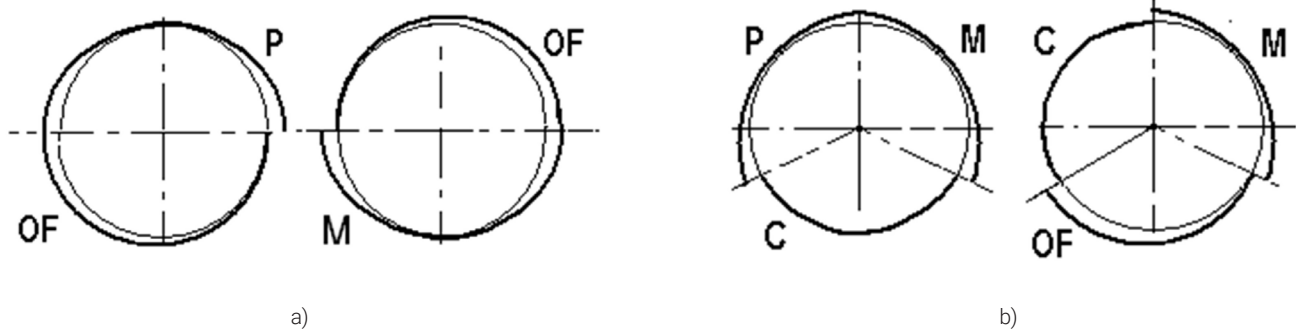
Multilobe journal bearings with the lobes of different geometries; a) 2-lobe, b) 3-lobe; profiles: C - cylindrical, M - classic (discontinuous), P - pericycloid, OF - Offset
